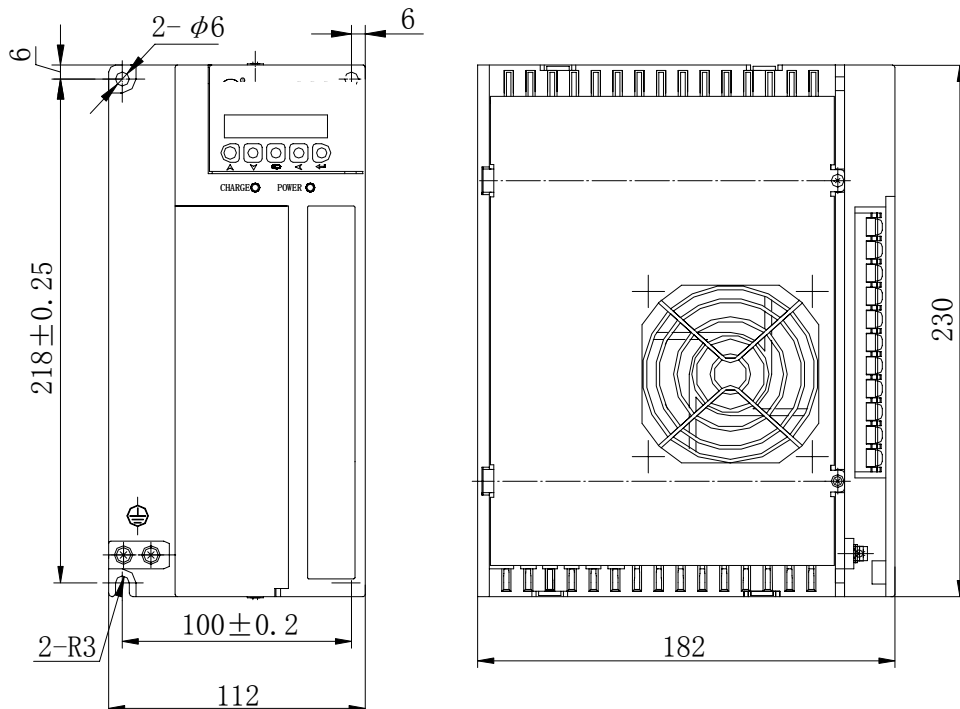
Appearance dimensions of GE2050T/GE3048T (unit: mm)
